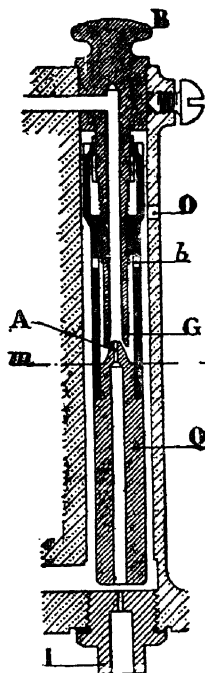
Section through slow running jet of Zenith Carburettor.
